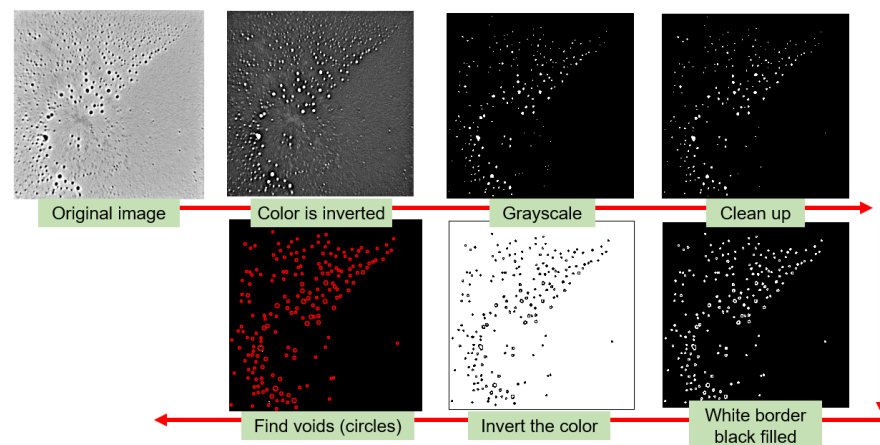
The void extraction procedure involved analyzing X-ray images of the solder layer to identify and extract voids using image processing techniques.
